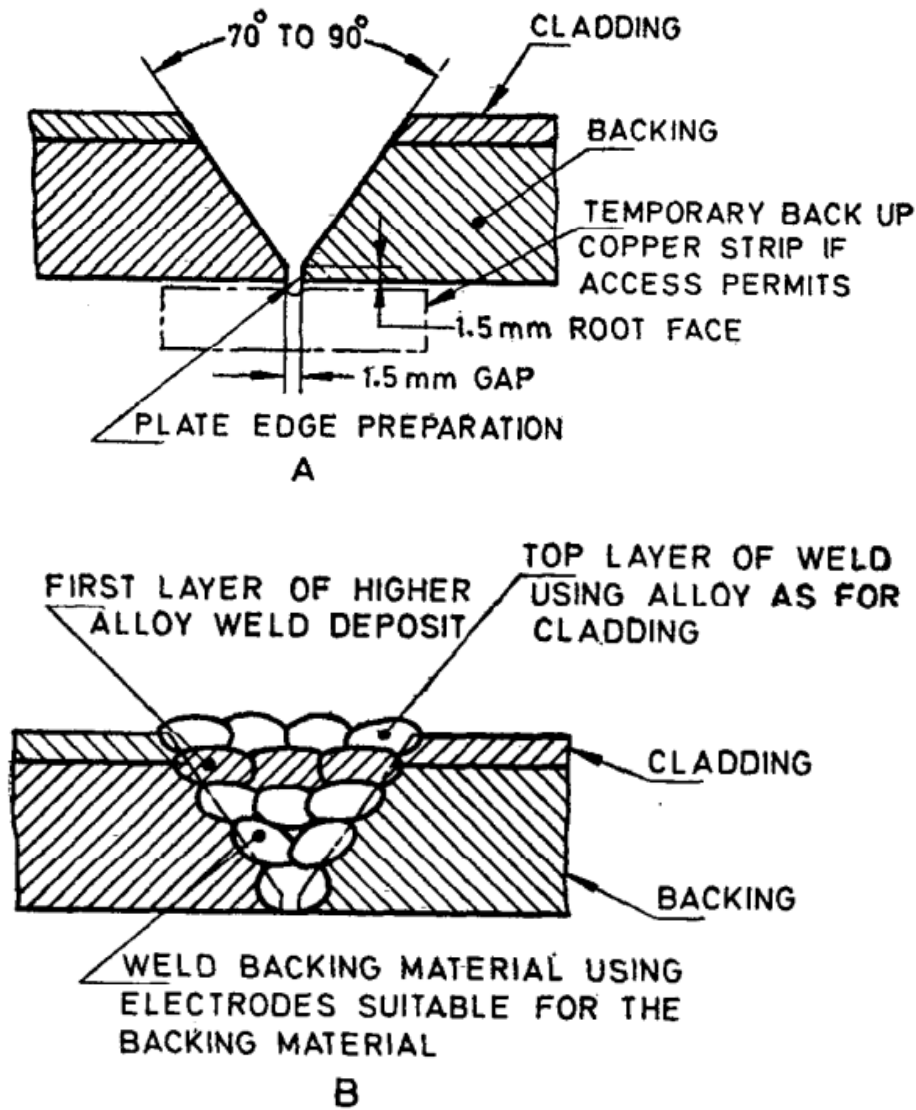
WELDING SEQUENCE FOR CLAD PLATE WITH ACCESS TO THE CLAD SIDE ONLY
